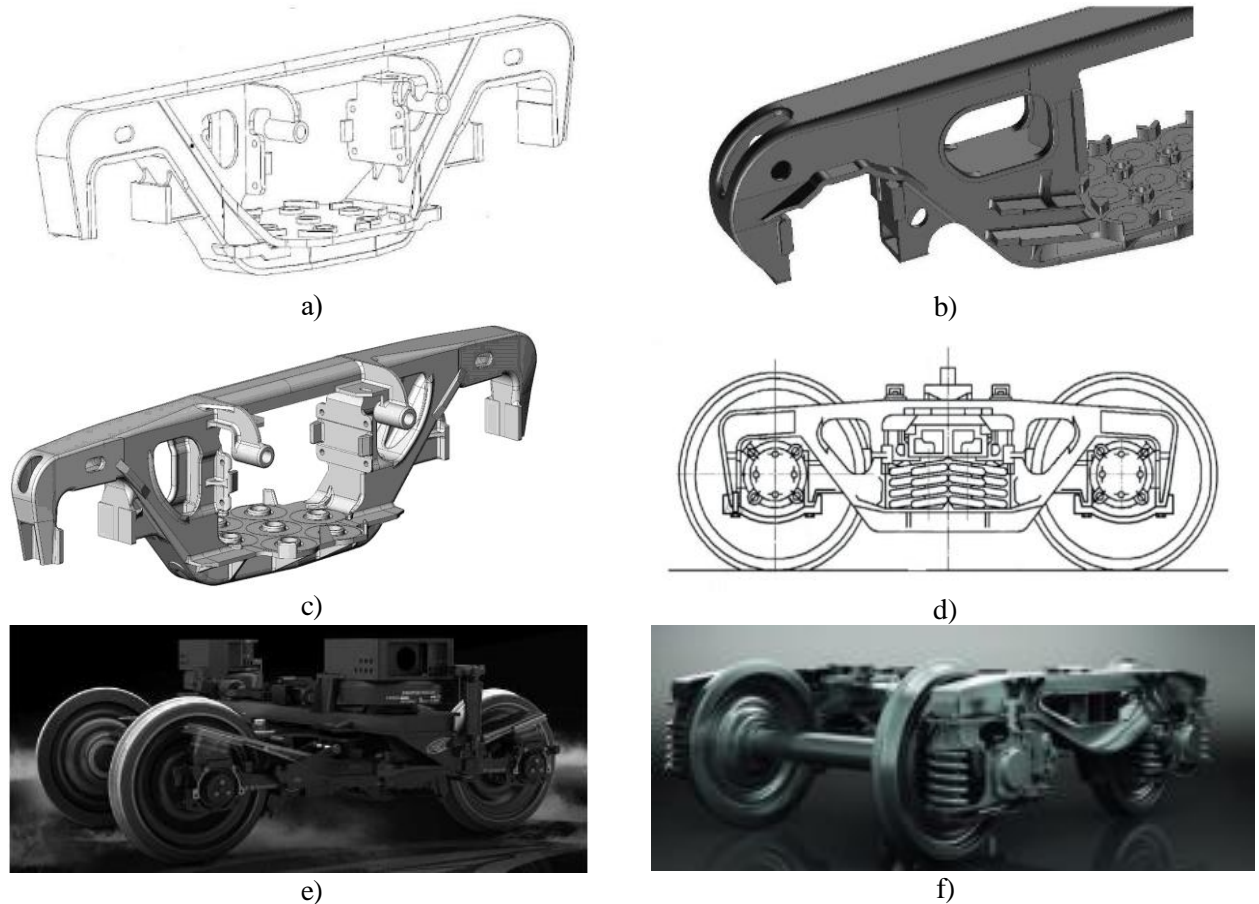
Running parts models of freight cars: a) side frame of welded structure [38]; b) comprehensively modernized cast side frame [44]; c) cast side frame of an improved design [41]; d) cast bogie of an improved design with a box string [40]; e) new bogie of welded structure [46]; f) welded bogie of improved design [47]
